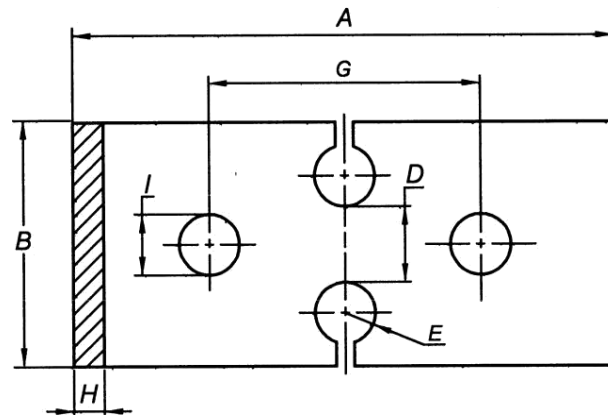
MACHINED TYPE A TENSILE TEST PIECE
